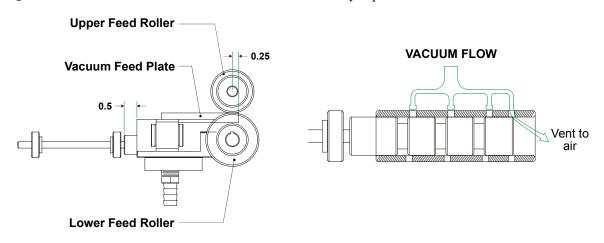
Feeder Vacuum Valve with End Port Fully Open
